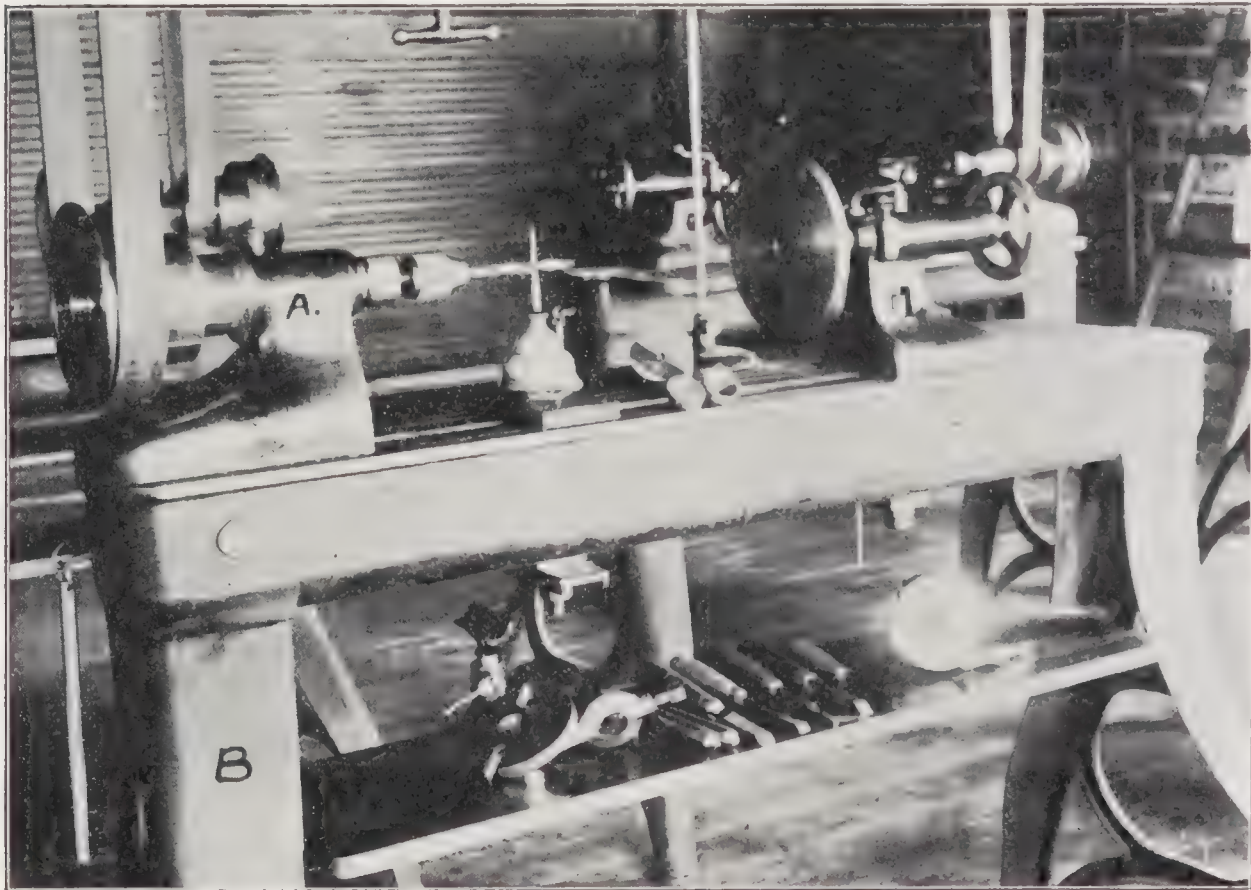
FIG. I. SHOWING (A) LATHE EQUIPPED FOR DRILLING AND (B) EXTRA EQUIPMENT FOR METAL-TURNING.
